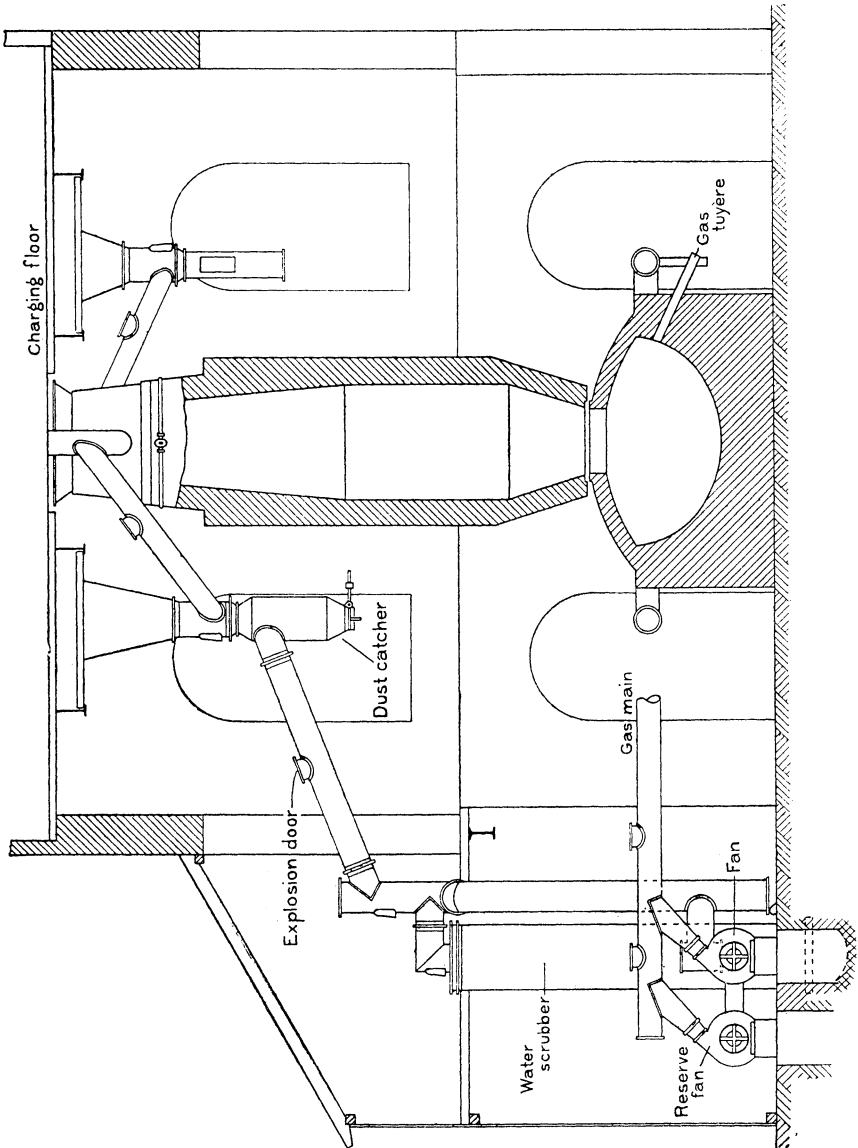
Sectional elevation of furnace at Trollhättan, showing arrangement of gas circulation.
